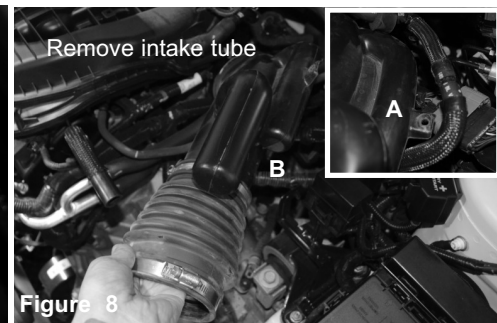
A) Pull back any lines away from the intake tube. B) Now remove the intake tube out of vehicle.
